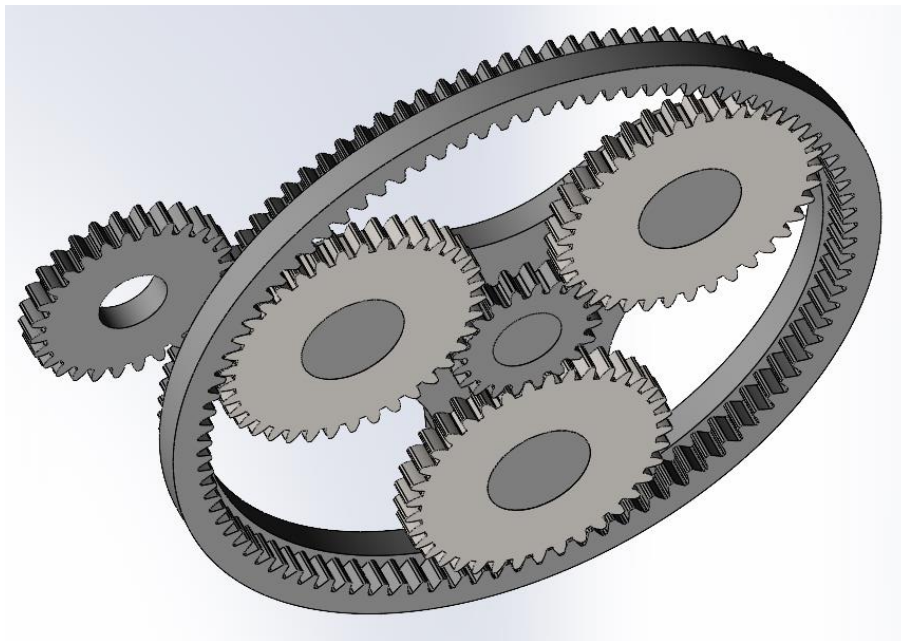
Cracked Planetary Gear Train Assembly CAD Model
